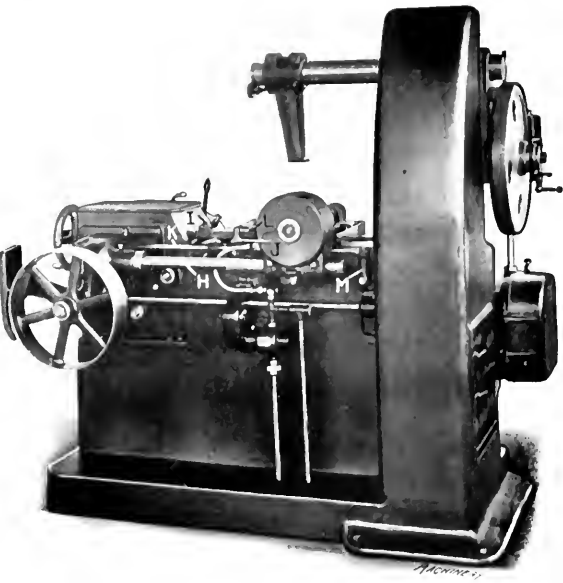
Rear View of No. 3-H Gear Cutting Machine
